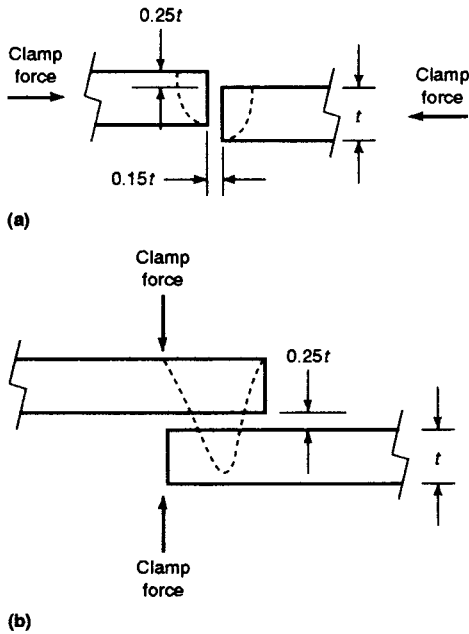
Clamping and tolerances for (a) butt joint and (b) lap joint. Dimensions are in units of percent of material thickness, t . Source: Ref 3
